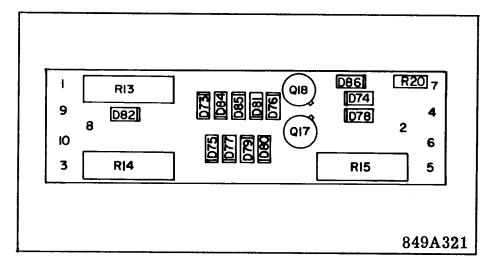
A. Printed Circuit Board Assembly for SDG1, 2, 3 and 4 Relays.
